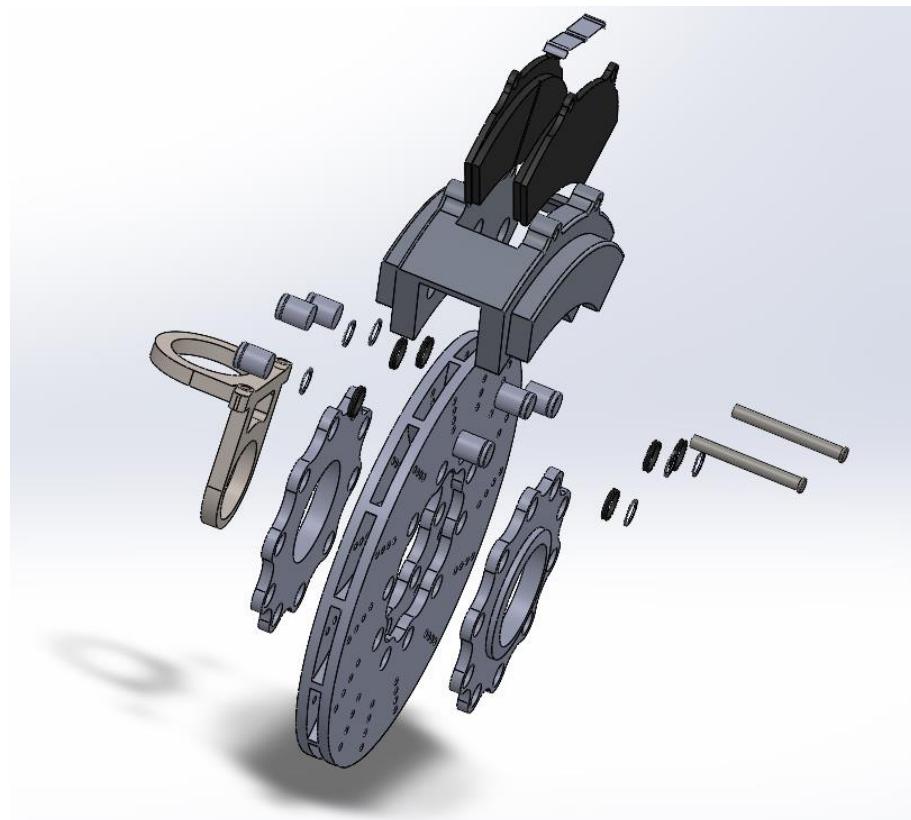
Brake System Assembly Design (Exploded Top View).
